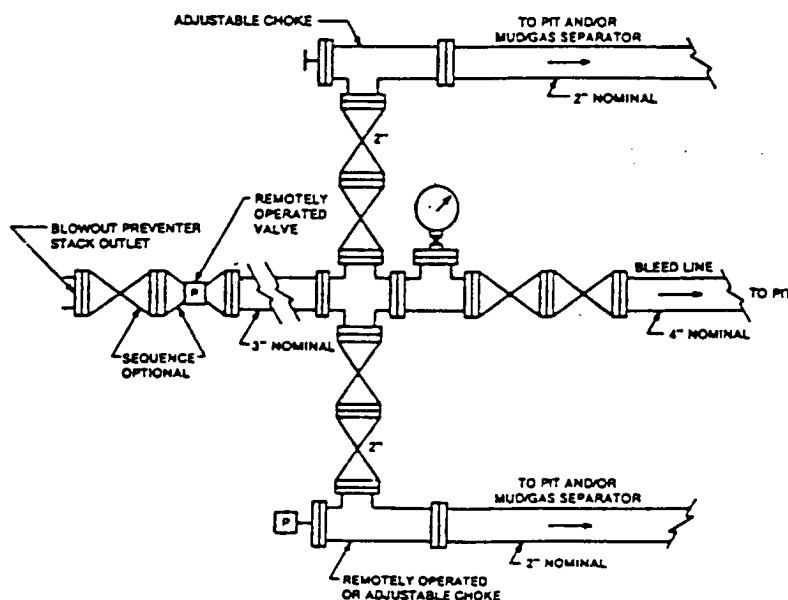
Typical choke manifold assembly for 5M rated working pressure service — surface installation.
